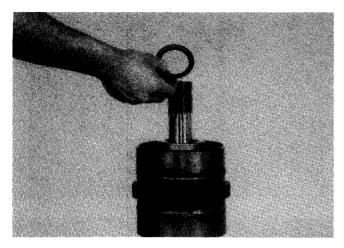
Position return spring retainer ring retaining washer on clutch shaft.
